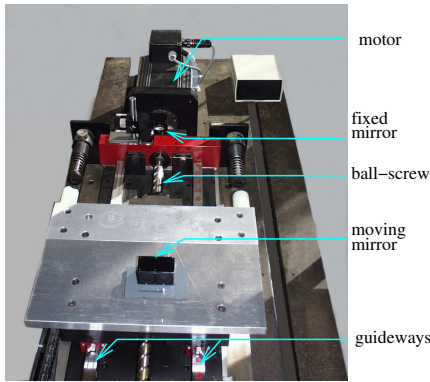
The machine tool table setup used to validate experimentally the tracking performance for sliding trajectories. The motor (top of the figure) is directly connected to the screw which is coupled to the table (bottom of the figure) via a ball-screw.
